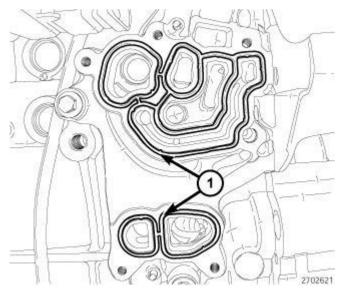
O-RING GASKETS Courtesy of CHRYSLER LLC
